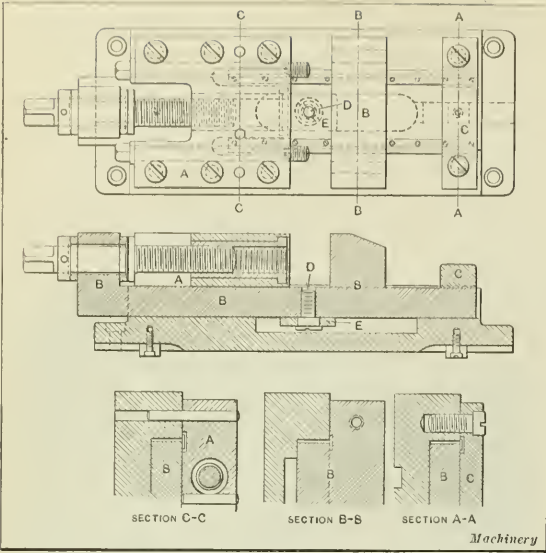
Sectional Views and Plan of Holmes Machine Vise
